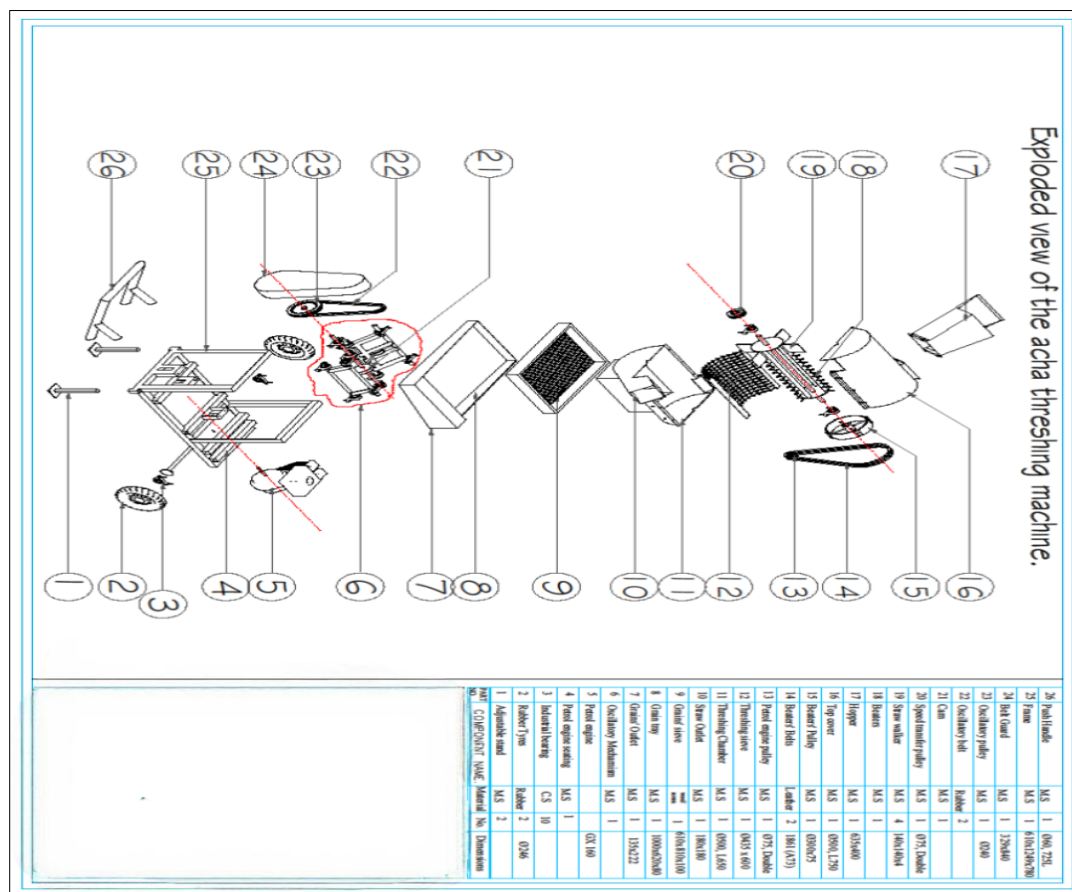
The Exploded Drawing of the Designed Acha Thresher
